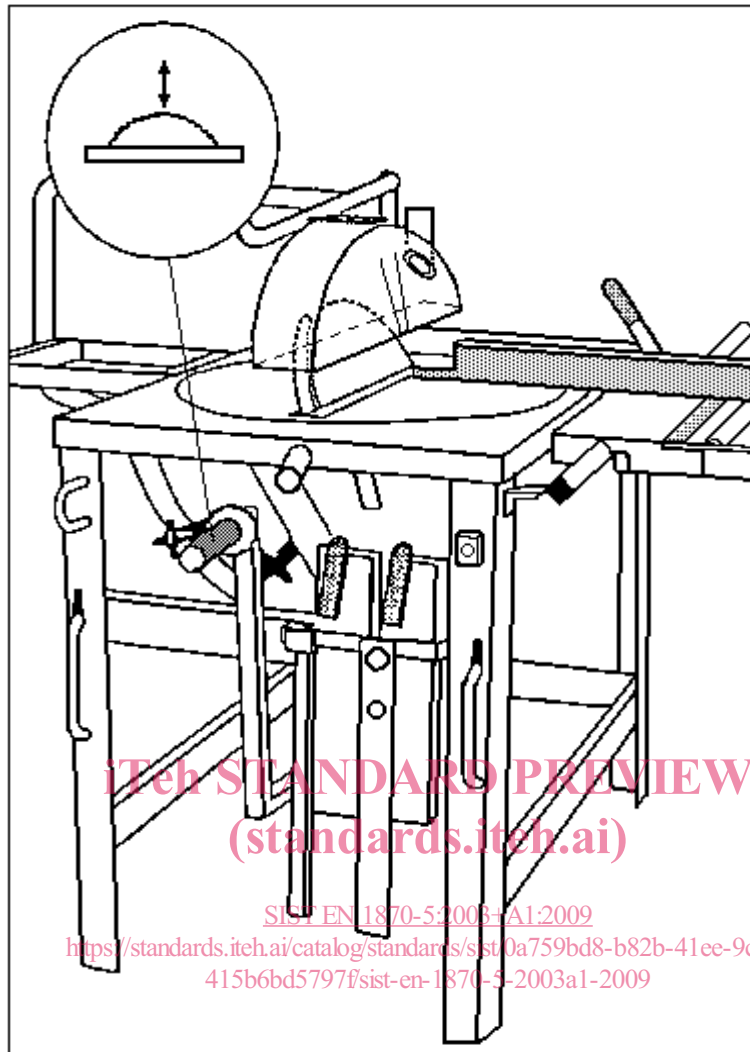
Example of a machine in the cross-cutting mode with moved workpiece
